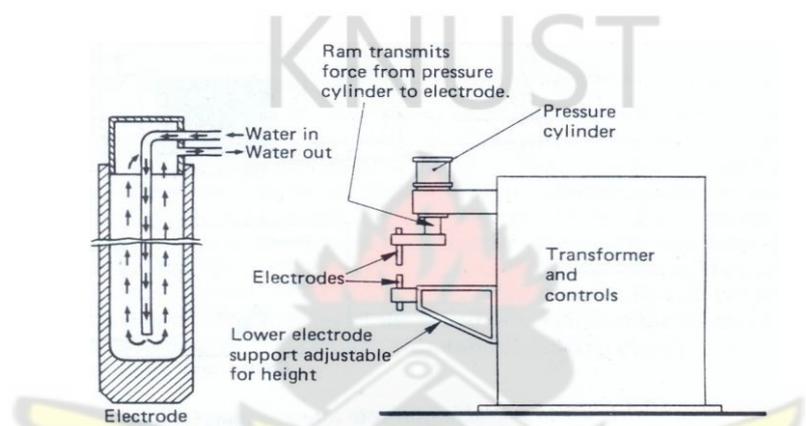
(b) larger spot welder with hydraulic pressure cylinder (Gourd L. M. 1995)
